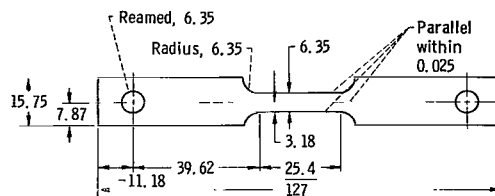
Standard sheet creep-test specimen. (All dimensions are in millimeters.)
